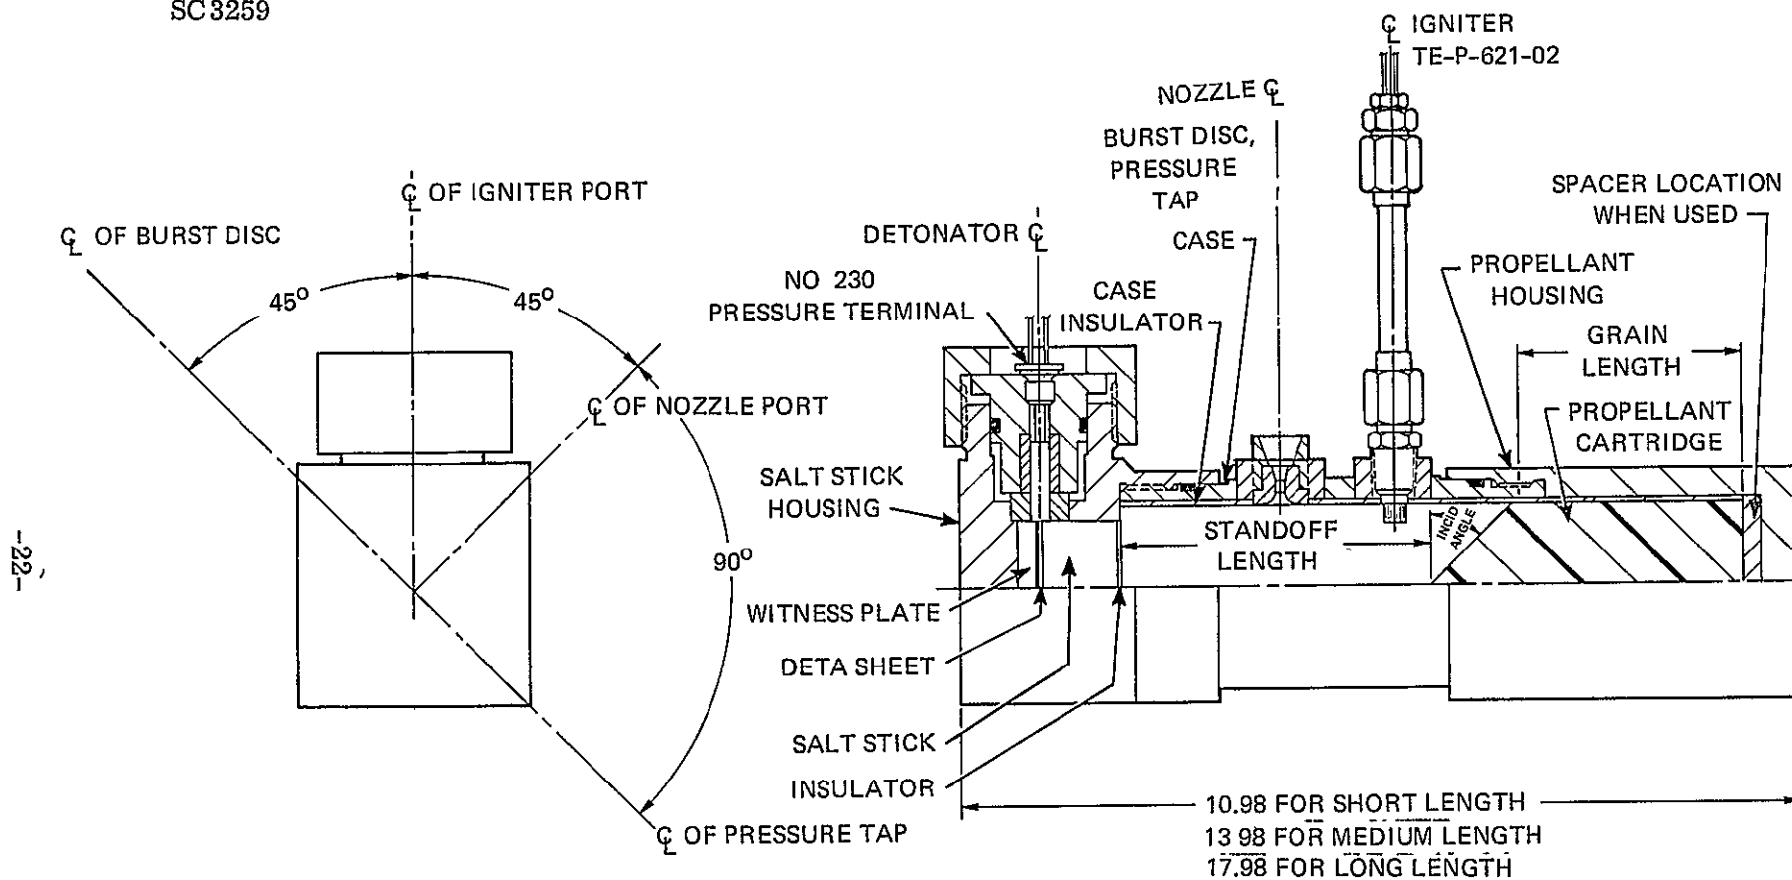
VENTED BOMB ASSEMBLY (VBA) END-ON VERSION
